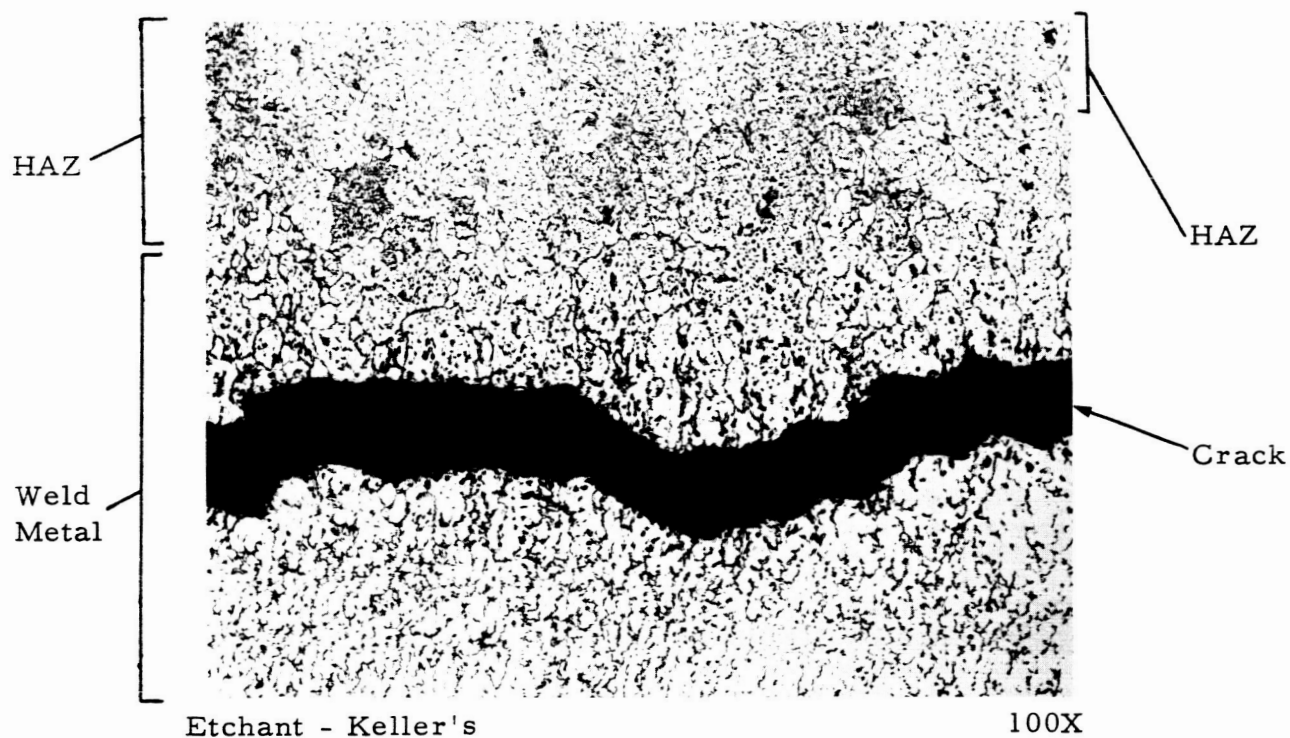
VIEW OF RUPTURE AS SEEN LOOKING DOWN ON OUTER SURFACE OF BULGED PANEL. THE CRACK RUNS IN WELD METAL VERY CLOSE TO HAZ-WELD METAL FUSION LINE. (TOE OF WELD)
